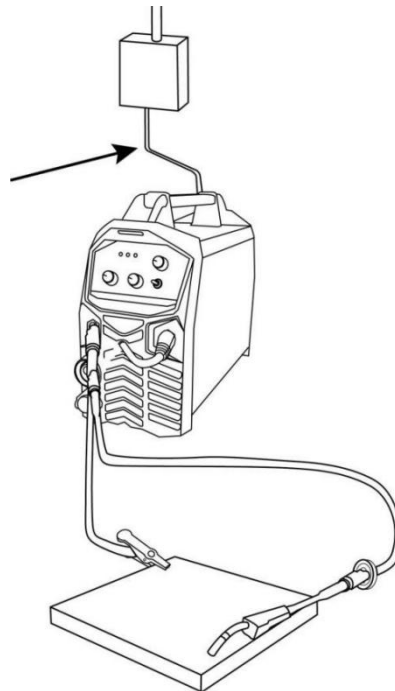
Setup for MIG Welding with Gasless MIG Wire
